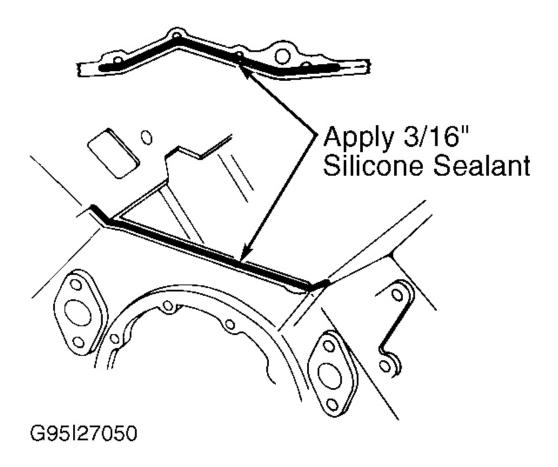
Applying RTV Sealant Before Installing Intake Manifold Courtesy of GENERAL MOTORS CORP.
